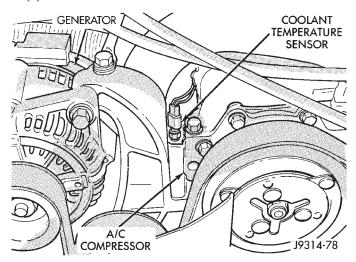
Engine Coolant Temperature Sensor—5.2L/ 5.9L Engines
